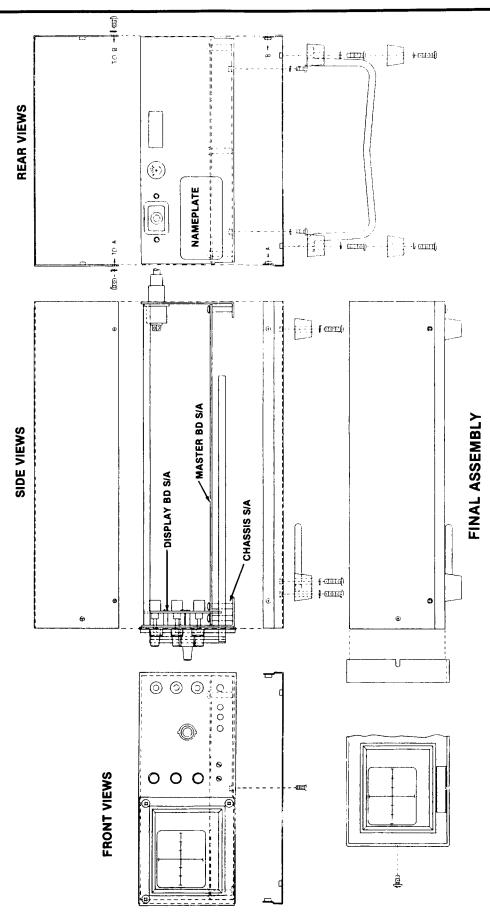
FINAL ASSEMBLY — MODEL 3110
